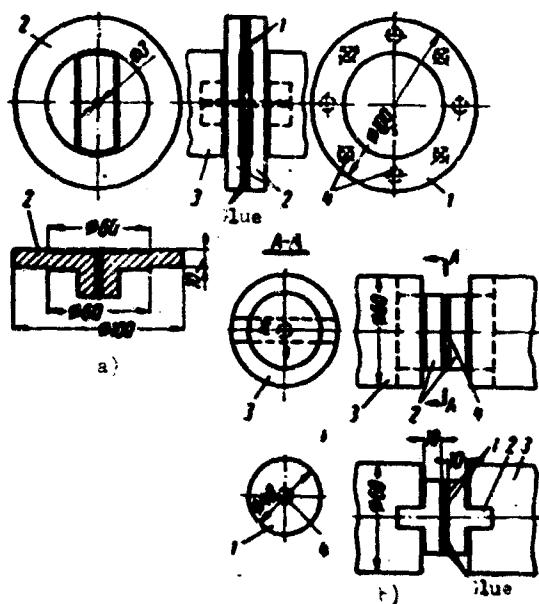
Diagram of arrangement for shear test of welded point connections by torsion: a) for annular samples; b) for disk samples.
